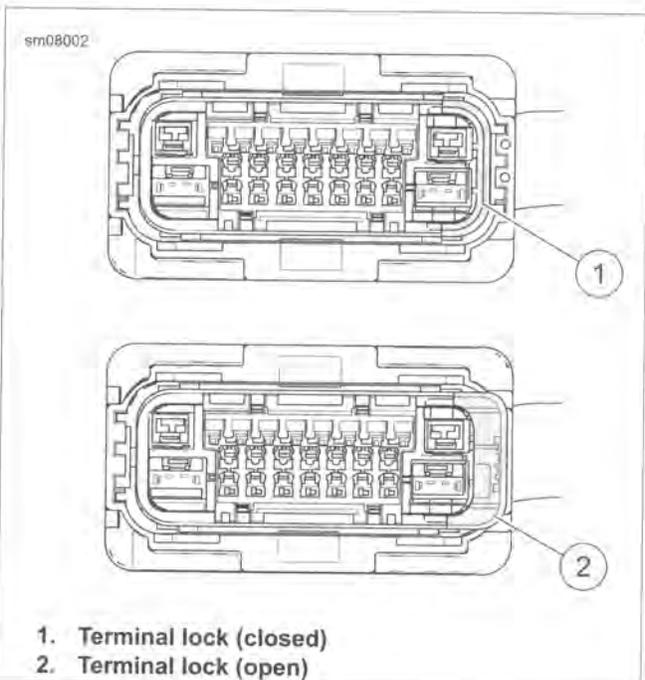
Bosch BTC Sealed Connector Terminal Lock
